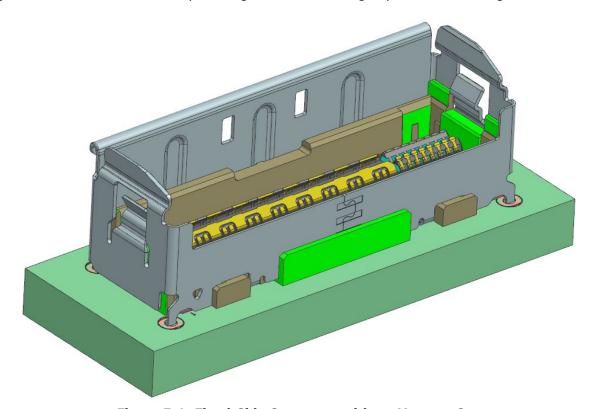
Fixed-Side Connector without Vacuum Cap
